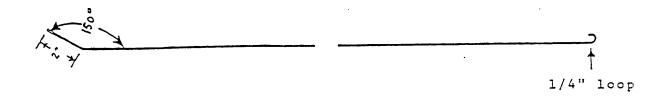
Cable fishing tool, 36" gas welding rod, 1/16" dia.
